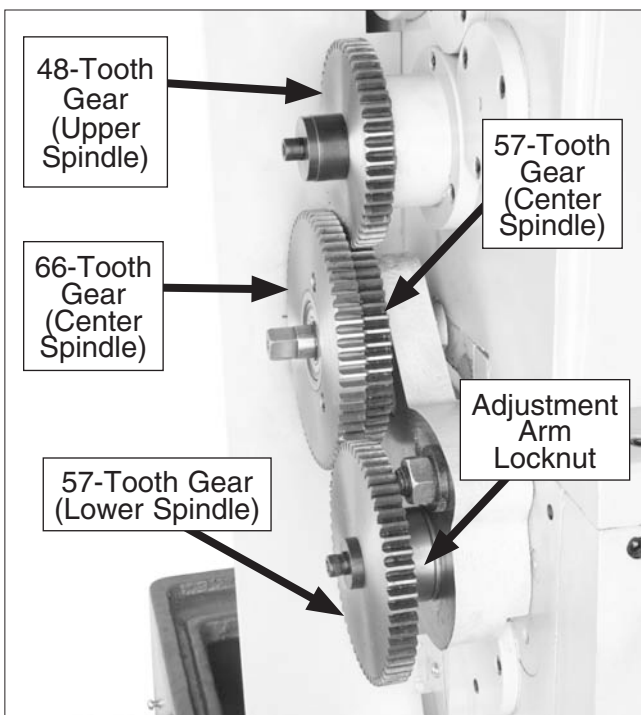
Change gear setup for dimetrial and modular thread cutting.
